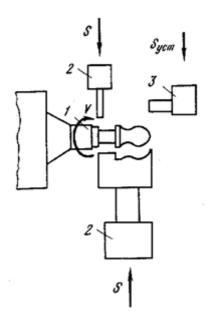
Scheme of the work of the bar-shaped cutting machine
